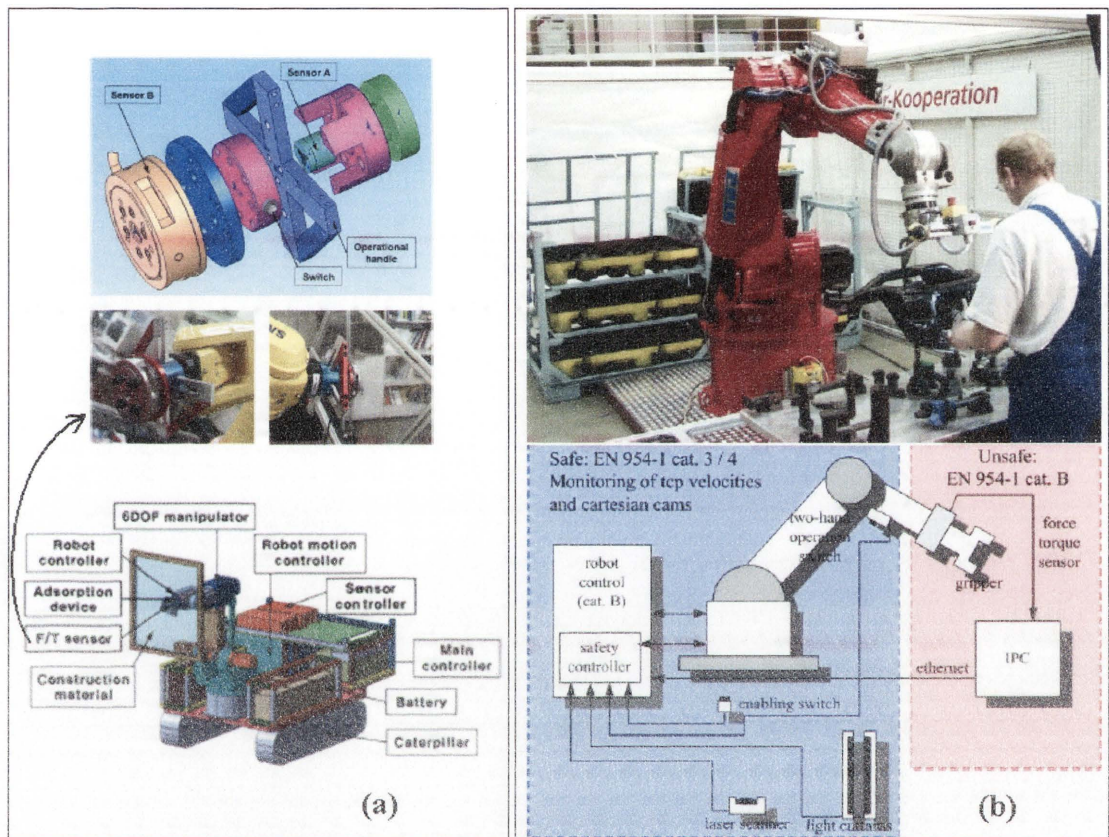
(a) System overview of multipurpose robot for installing construction materials [56][57], (b) System overview of PowerMate robot for gearbox assembly [58]
